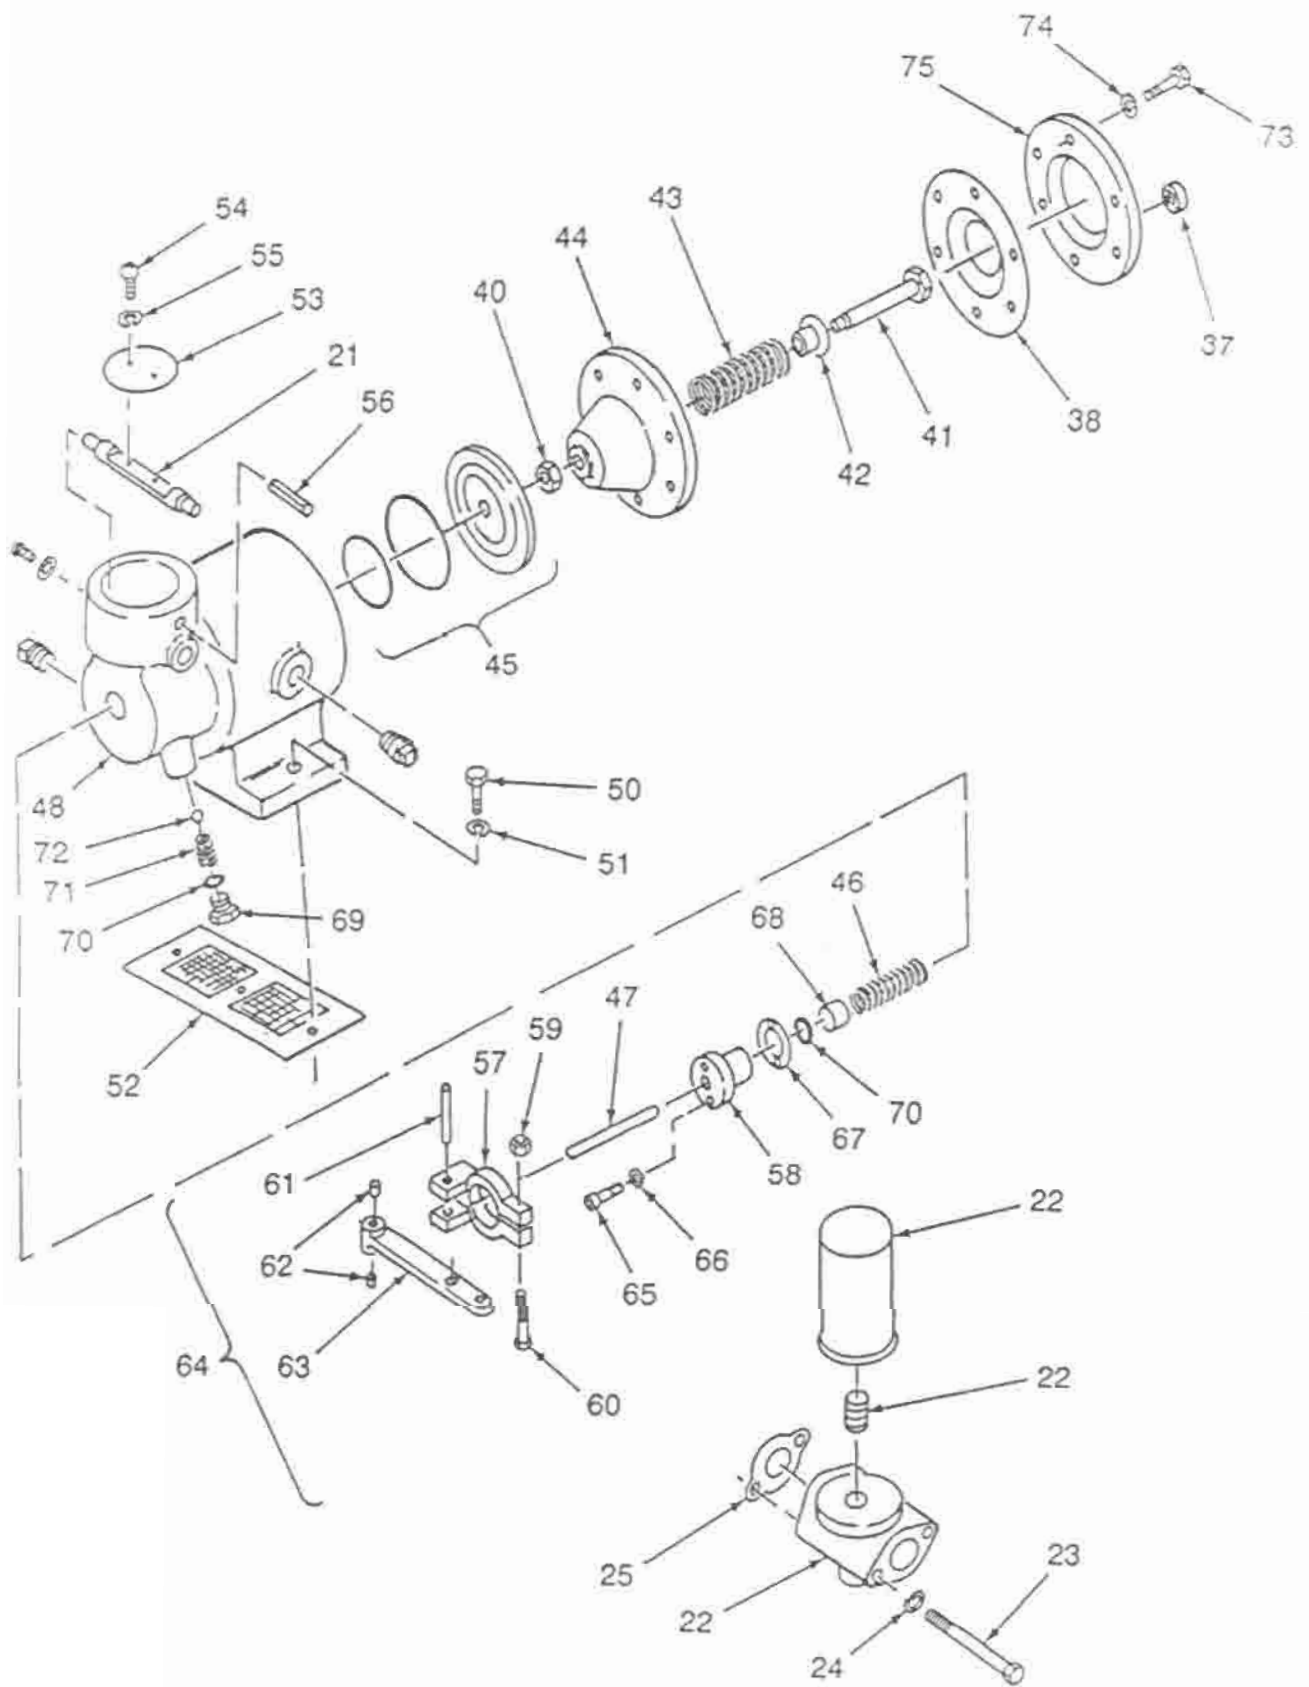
Air Compressor Group Disassembly (Sheet 2)
